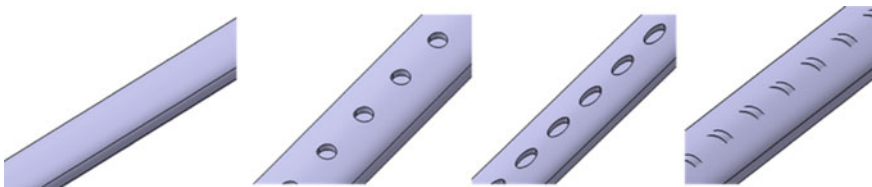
a Plain crossbar, b circular holes, c oval holes, and d spiral ribs
